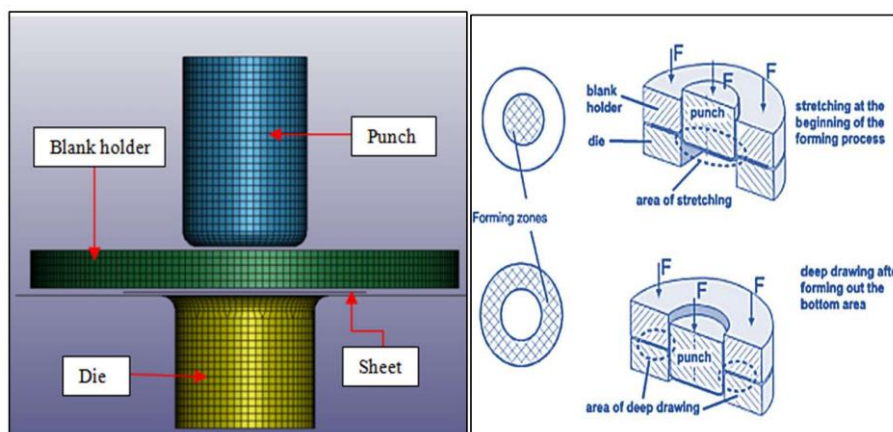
a) Deep-drawing parts b) Forming zones and forming areas in the deep-drawing [21].
